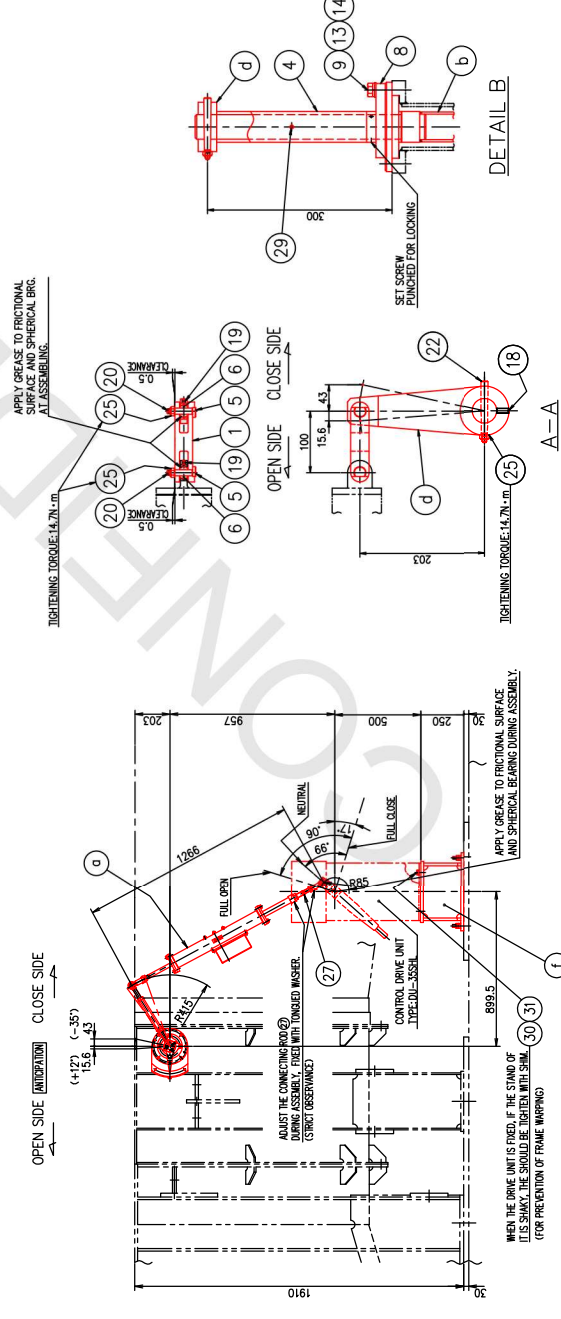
PILOT VALVE DRIVE LINKAGE MECHANISM ASSEMBLY
